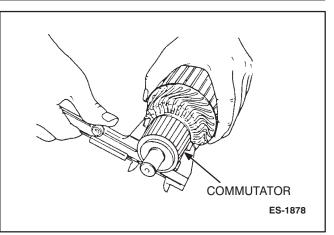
MEASURING COMMUTATOR O. D.
